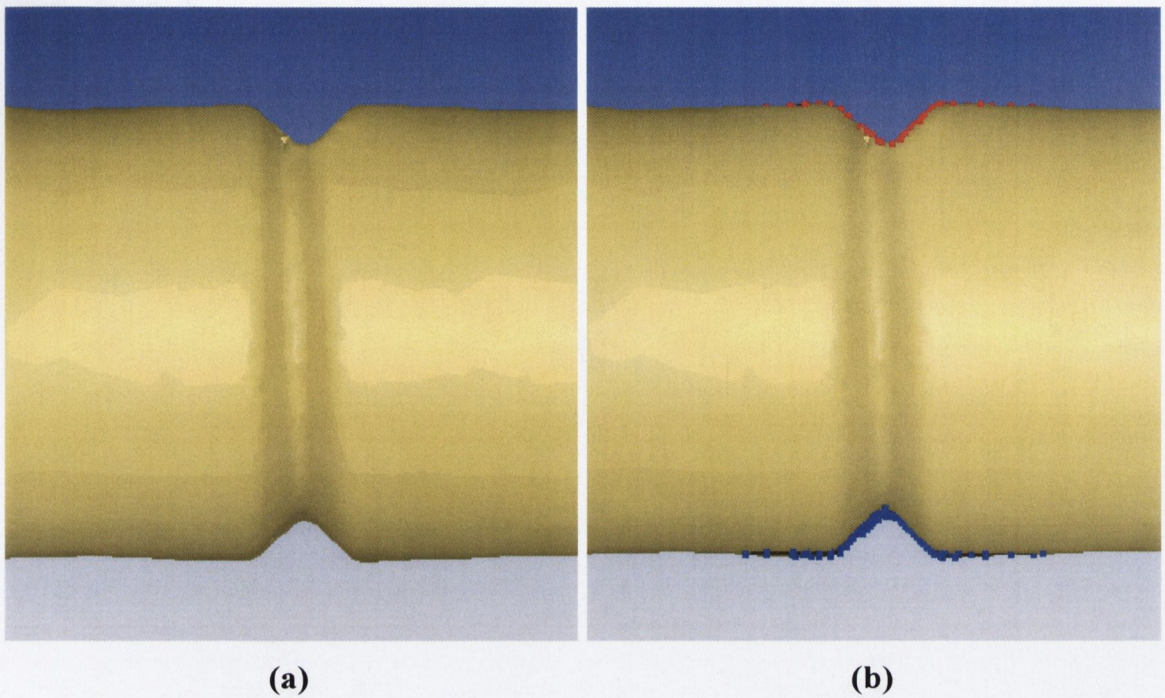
(a) Illustration of the first groove form and (b) area of contact between the workpiece and both dies, after 270° workpiece rotation.
